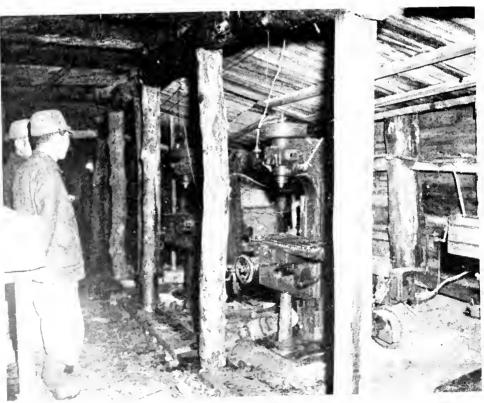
, Seto plant. (The tight working quarters shown here were not uncommon.)
